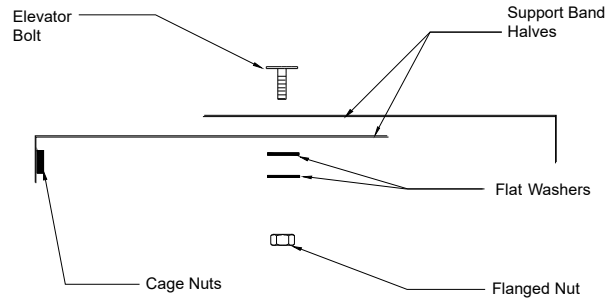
Topview assembly of Support Band - Elevator Bolt, Washers and Nut
